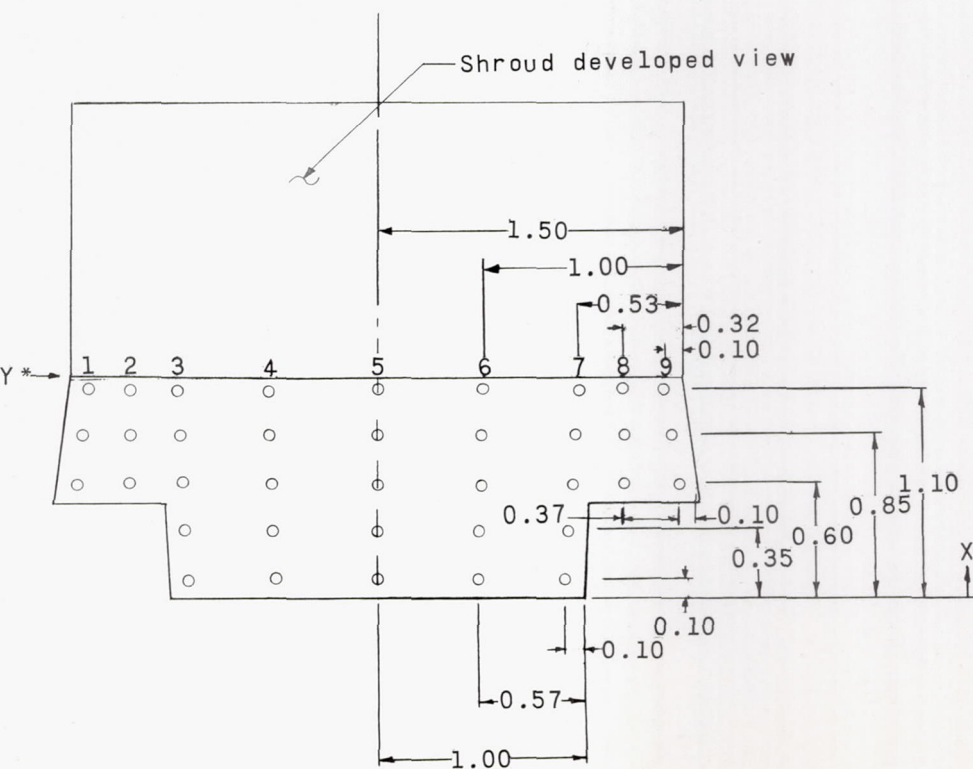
Detail drawing of shrouds. (All dimensions in inches unless otherwise noted.)
